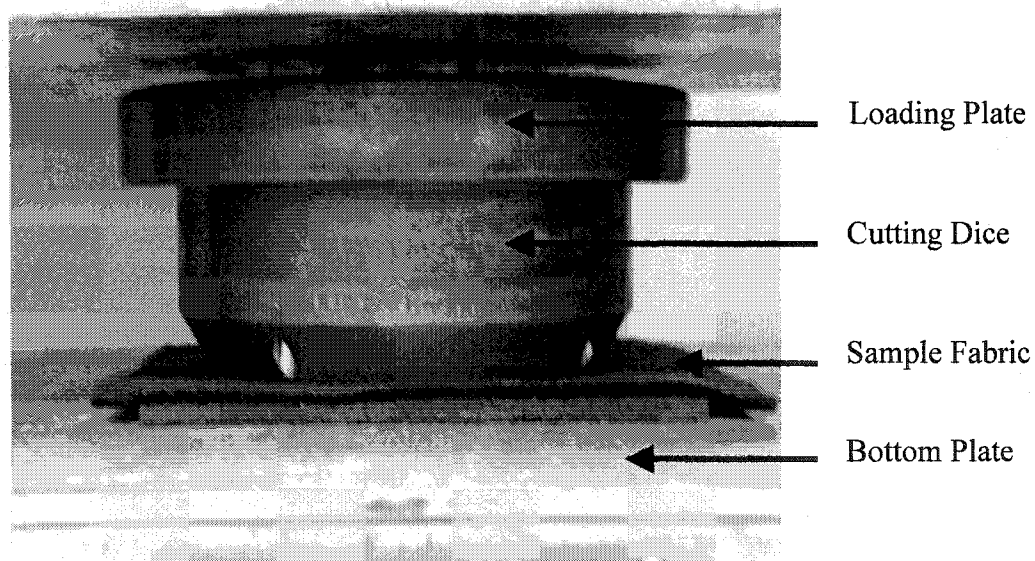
Fabric Cutting Device and Cutting in a Loading Machine
